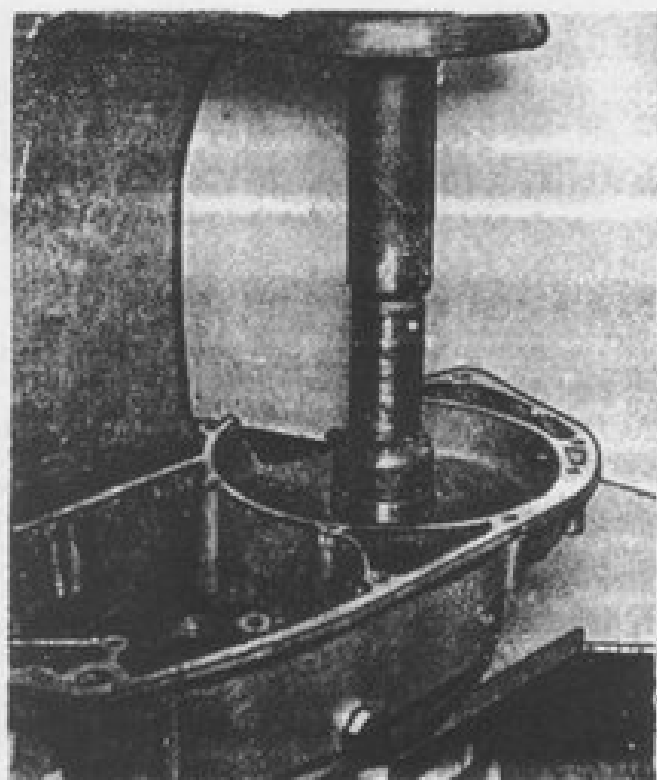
Pressing the crankshaft bearing outer race into crankcase half, HЖ-II-3 motorcycle.
